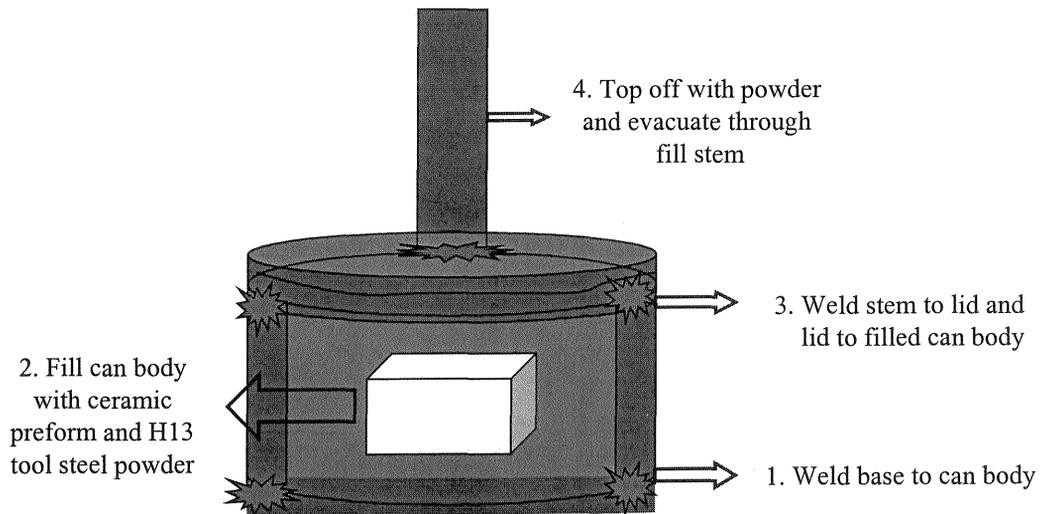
Schematic of the HIP “can” assembly employed in this study.
